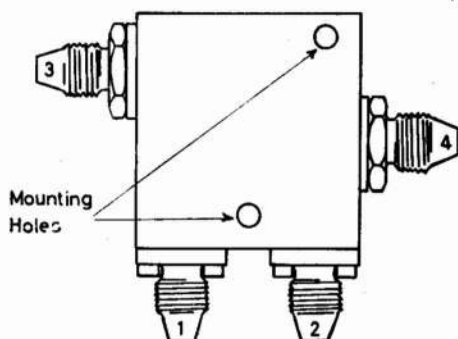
Two-way check valve, Ref. No. 6D/2265
